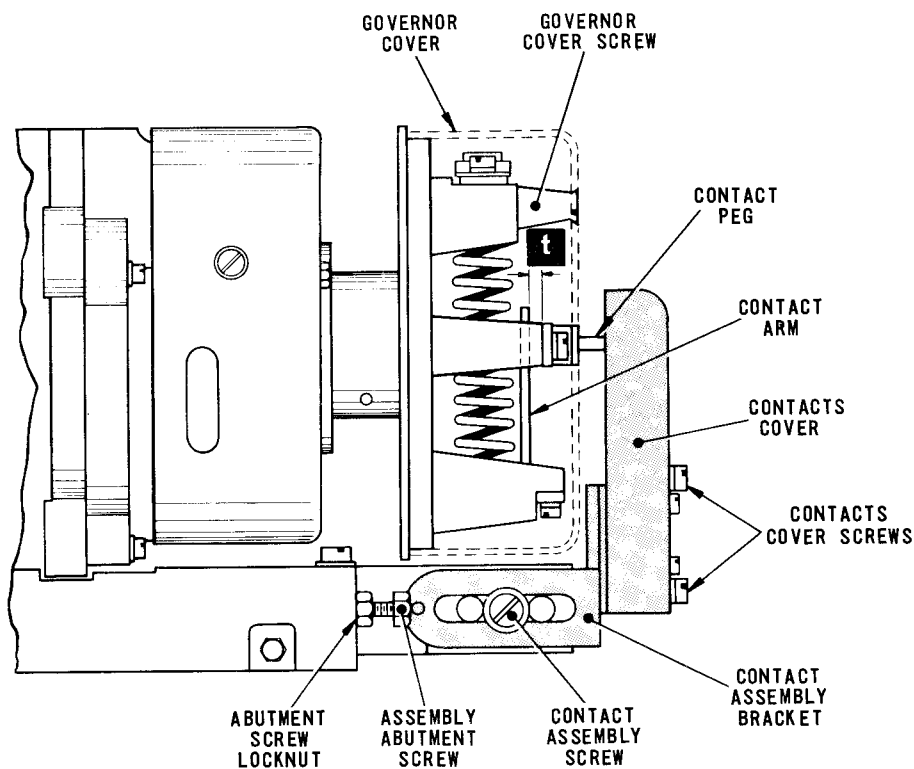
GOVERNOR CONTACT ASSEMBLY
